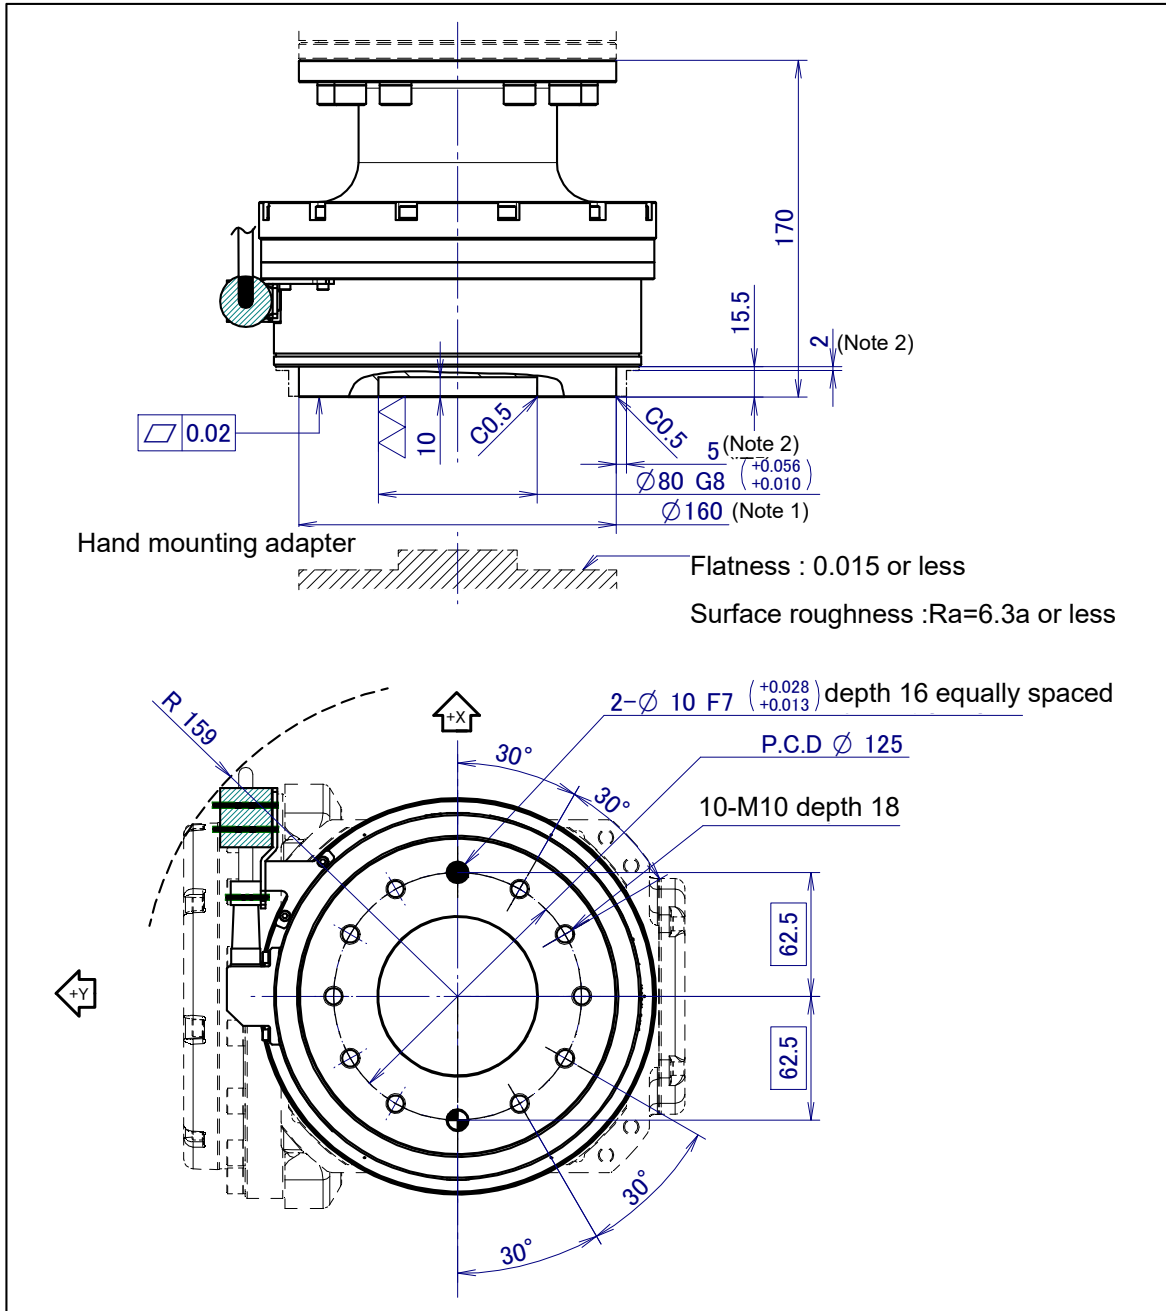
(e) Wrist section end effector mounting surface (FS-250iA adapter which does not need torque wrench)
